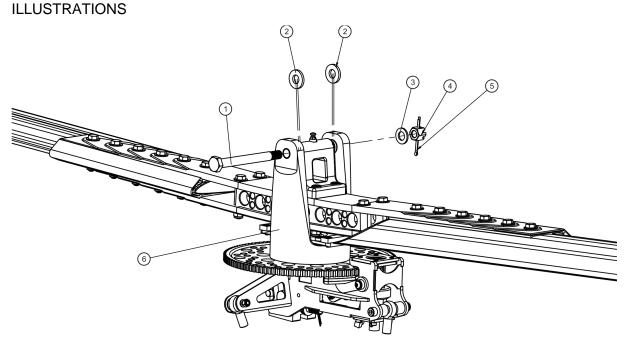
Removal rotor - teetering parts (Effectivity: RS II)
